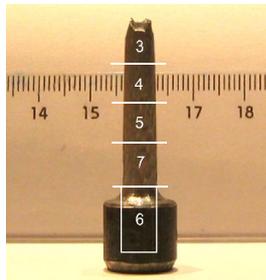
The St 3 sample destroyed at axial tension with a scheme for cutting testing samples. The upper part is the destruction zone; the lower part is the zone of fastening the sample in the tensile-testing machine.
